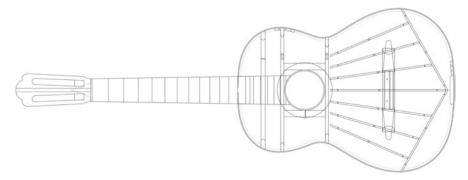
Plan of 1937 Hauser guitar (image courtesy of Guild of American Luthiers, luth.org, plan by Richard Bruné, rebrune.com)
